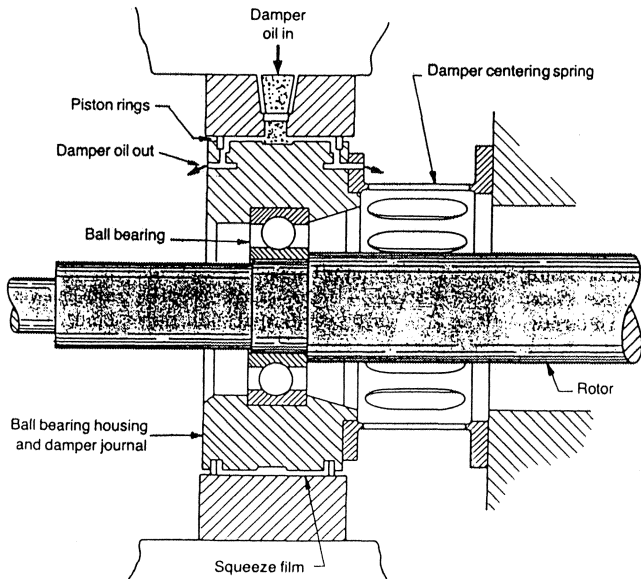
Squeeze Film in Parallel with Squirrel Cage Spring.
